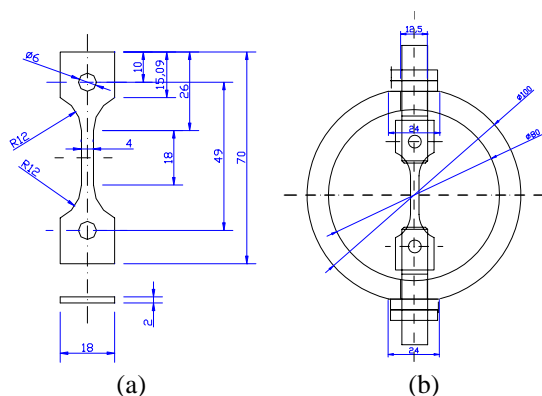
Drawings for (a) a test specimen and (b) a proving ring with a test specimen.
